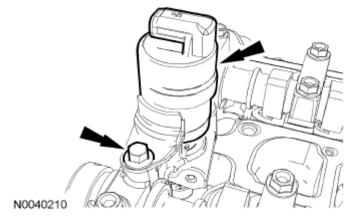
Locating Bolt And VCT Solenoid Courtesy of FORD MOTOR CO.
